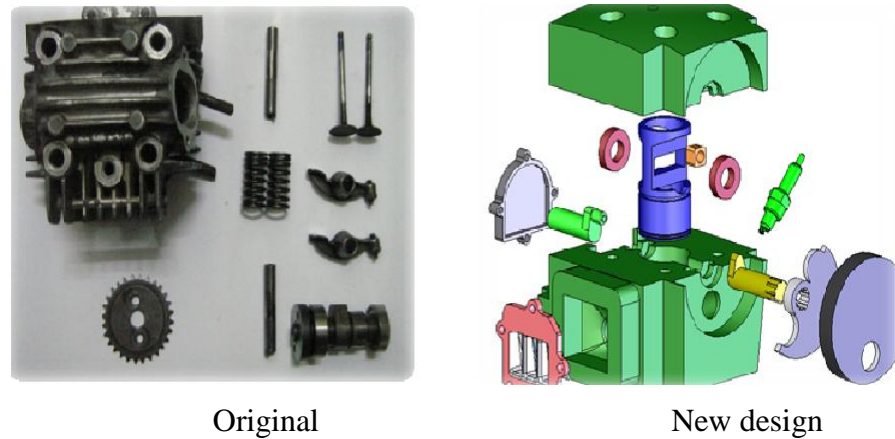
Cylinder head original 110cc and novel cylinder head concept
